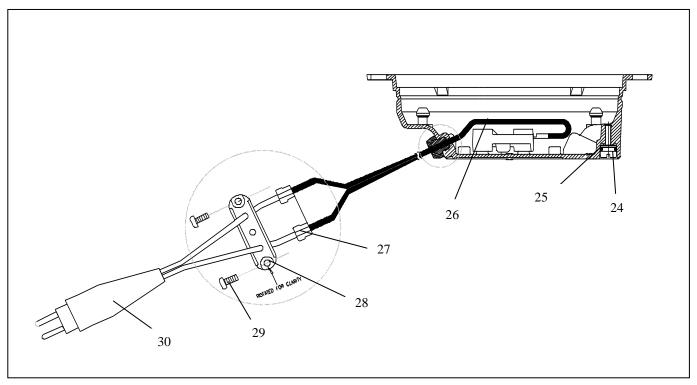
F-Range Light Fixture (Part 2 of 3)
